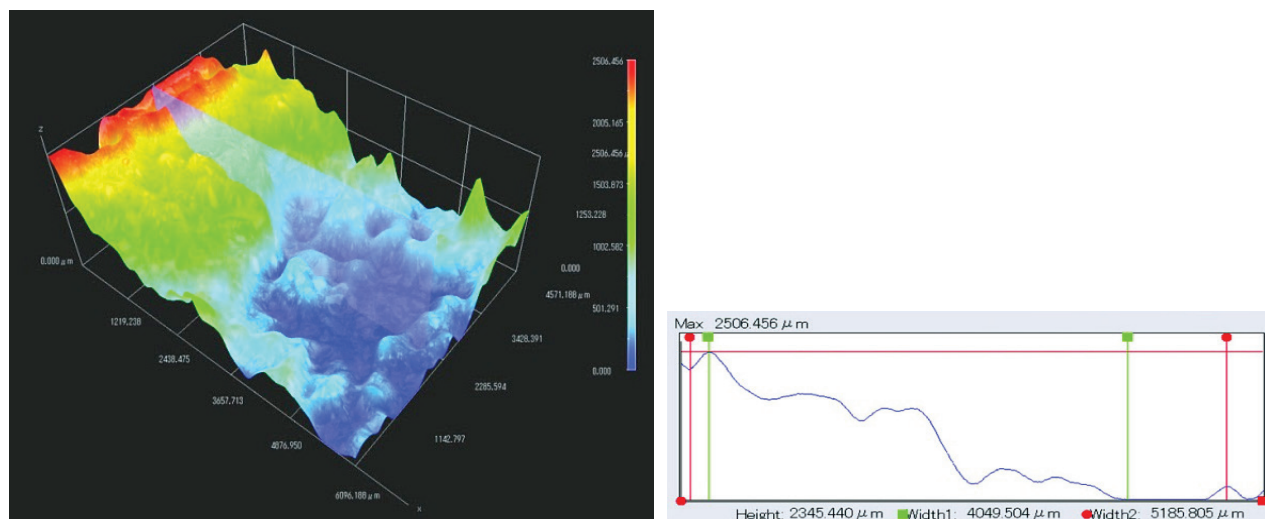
The 3D profile of fracture surface of Charpy specimen 3 (60°C).
